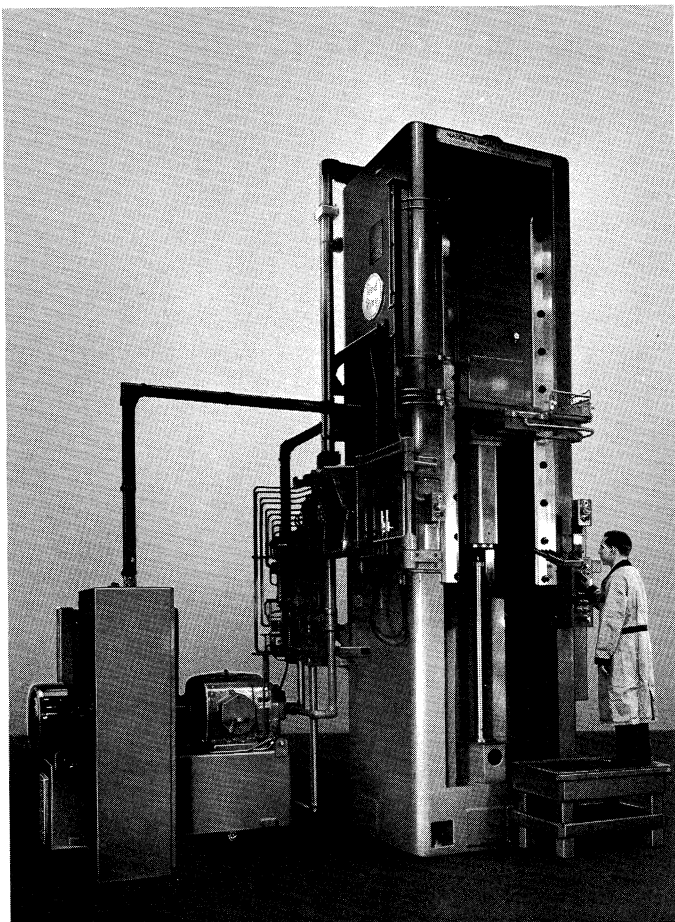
Red Ring Model VBA heavy-duty push-down pot broaching machine.
